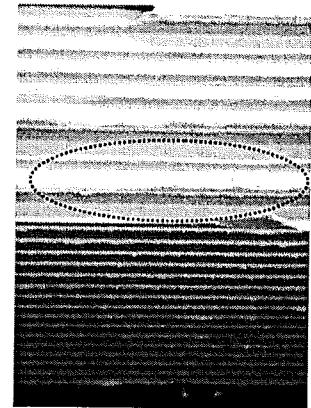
Small transversal cracks in channel wall of width 3.1 mm.
